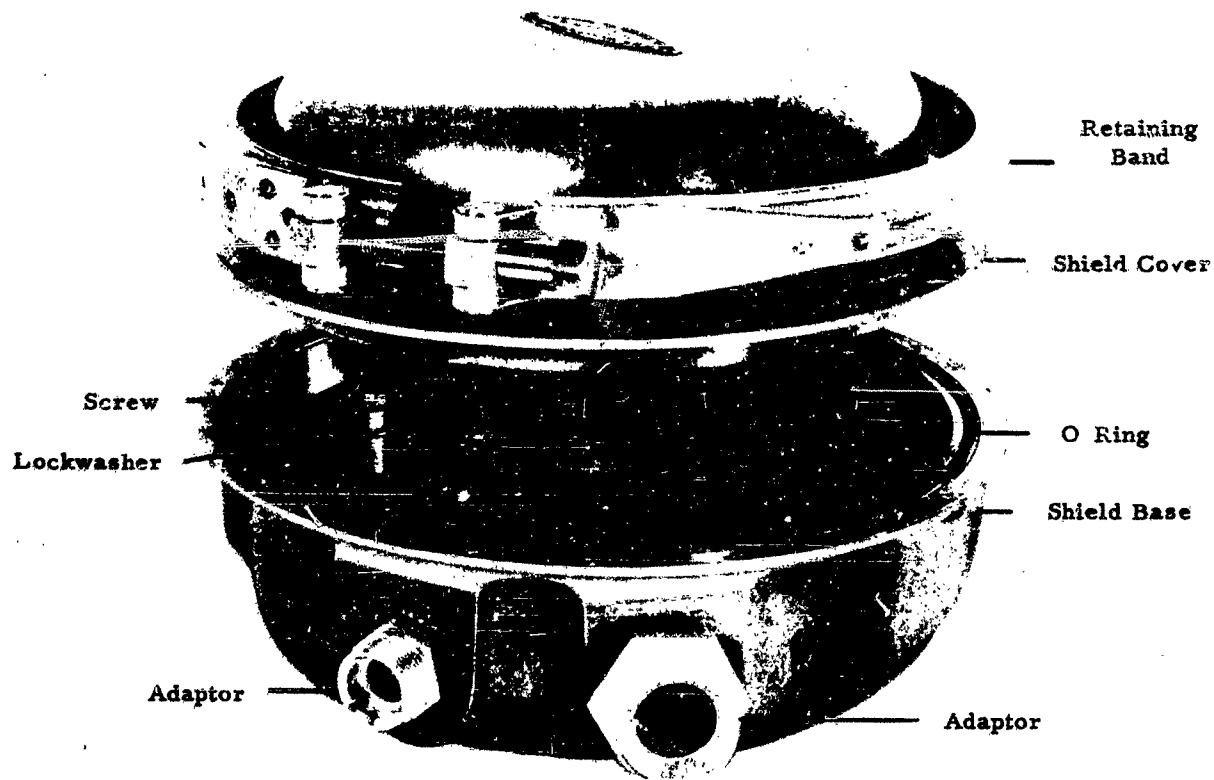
A Generator Regulator Shield Assembly Open
